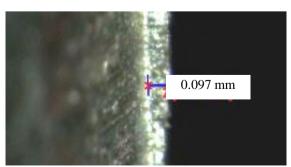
Biggest Burry dimension at material 1.2 mm
